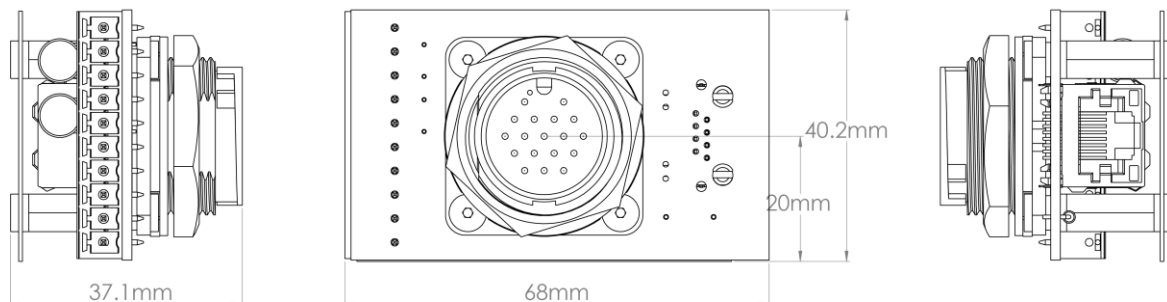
Patch Board Mk1 Dimensions (mm)
